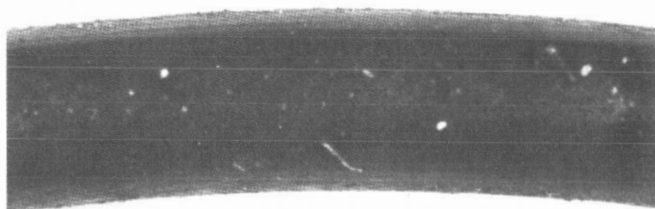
Enlarged view of unexposed O-ring sample (sample 1)
